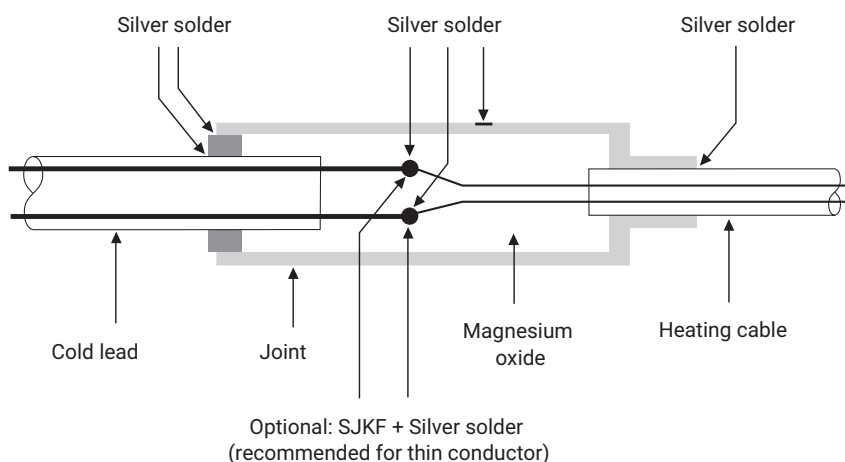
Completed heating cable/cold lead (hot-cold) joint for two conductor cable
